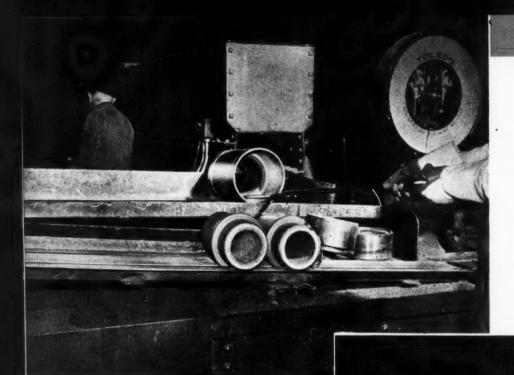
(Left) Castings Roll down to Weighing Station while the Molds Await Cooling in Water Spray Machine Shown in Center Background
